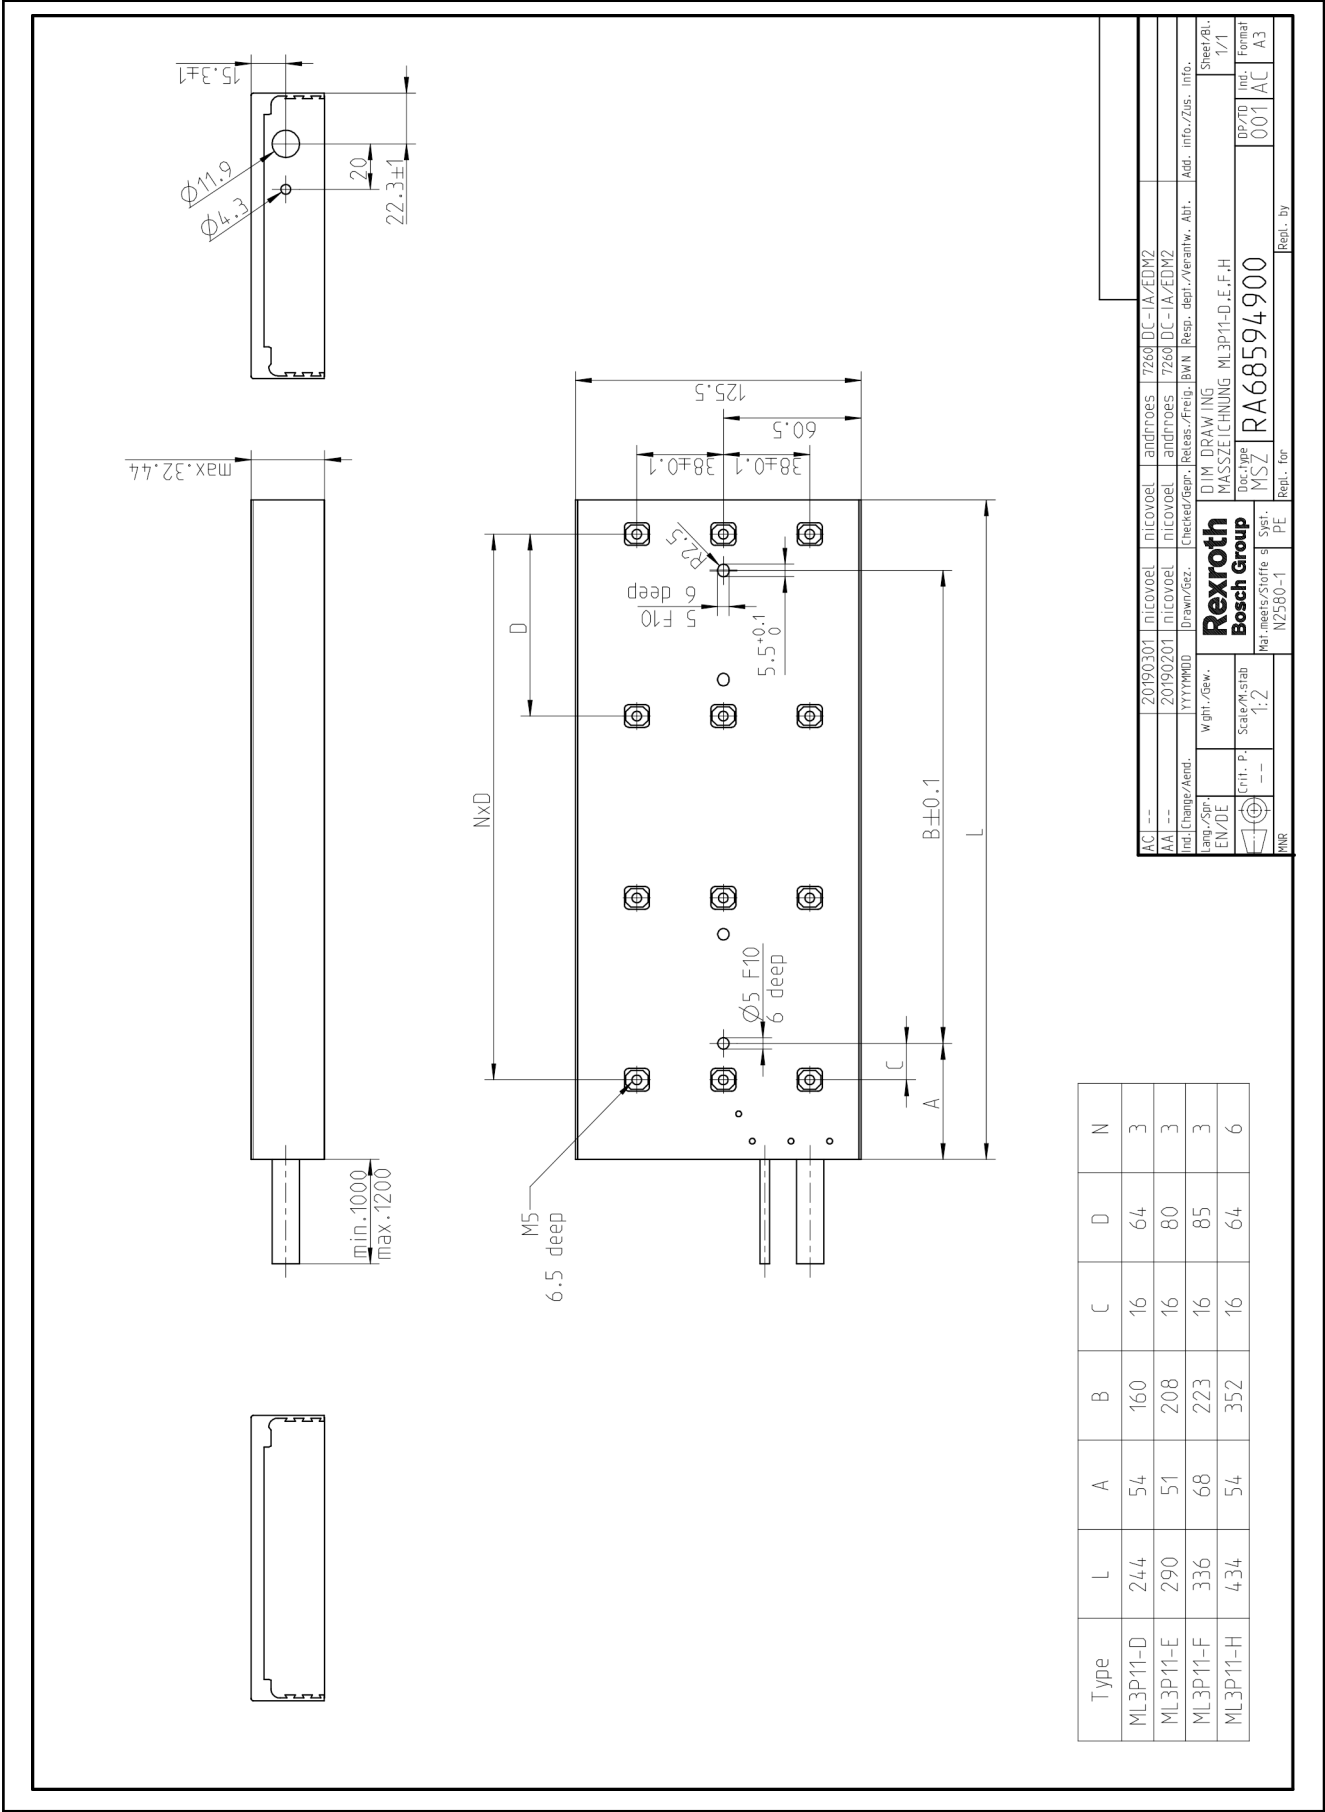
Dimension sheet primary part ML3P11 Frame lengths D, E, F, H
